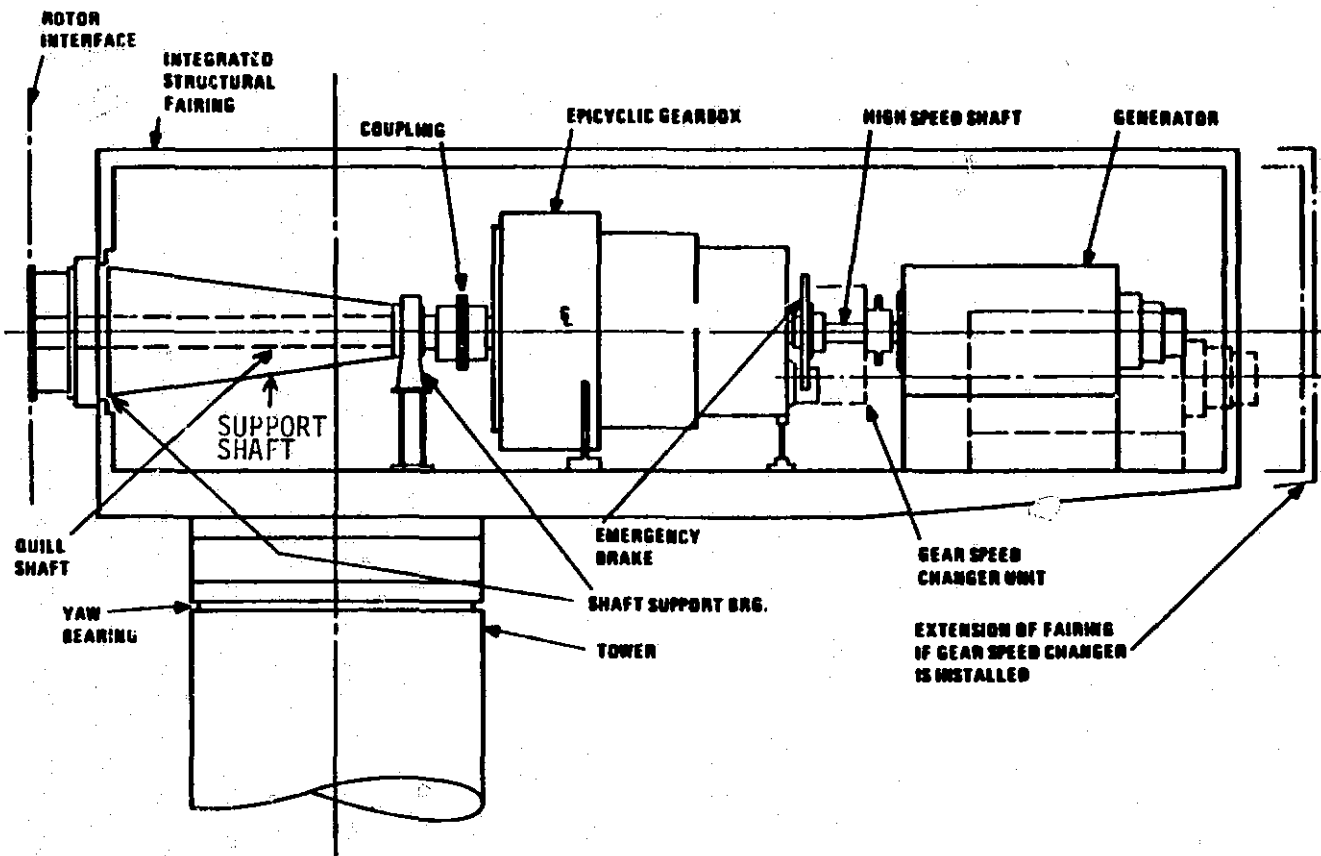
Non-Integrated Gearbox Quill Shaft Drive
